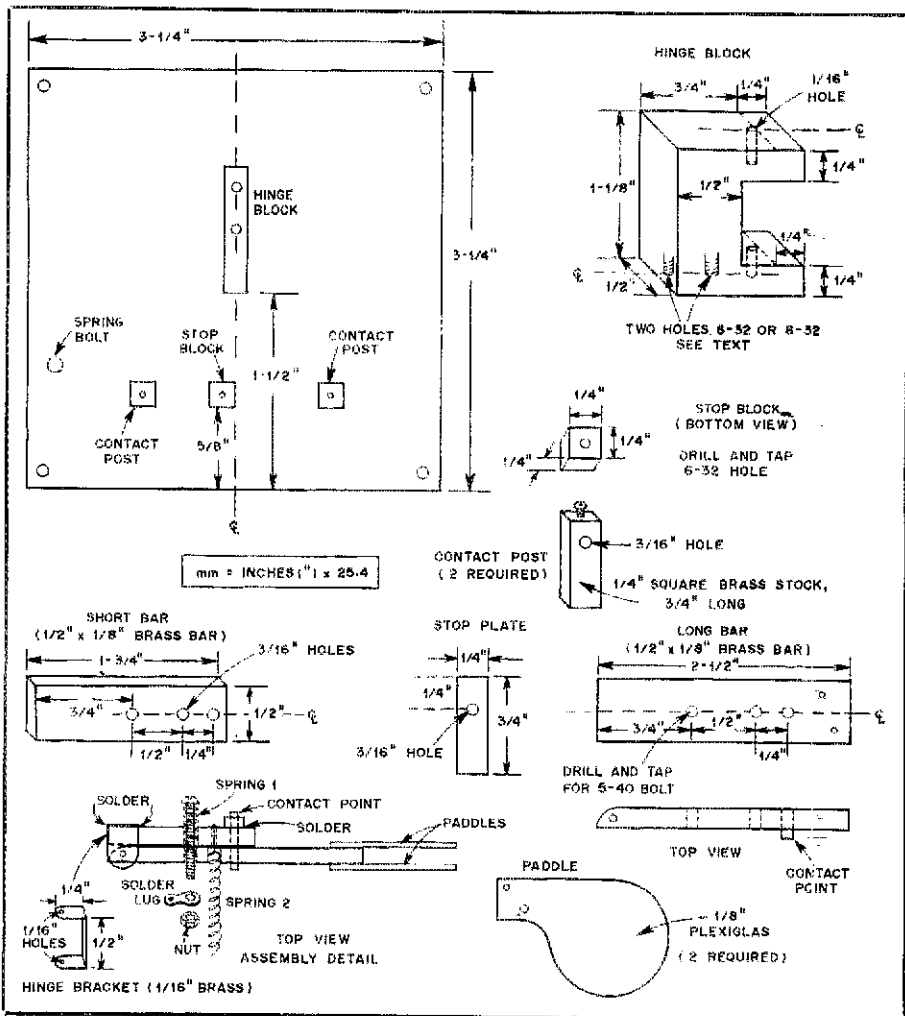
Dimensions and construction details are given for the keyer paddle built by W8OJN. See text for assembly instructions for parts where no dimensions are given.
